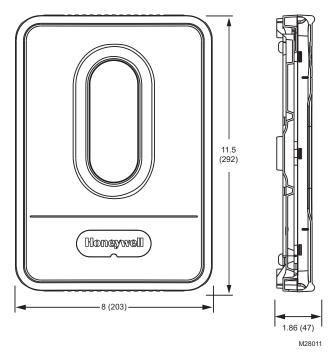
HZ322 TrueZONE panel dimensions in in. (mm).
